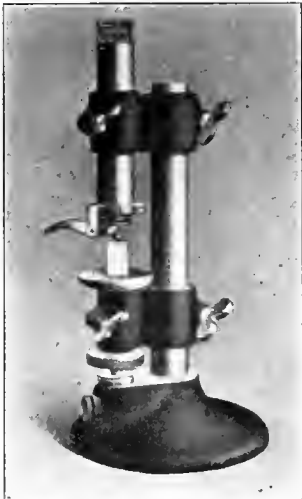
The Minimeter mounted for Measuring on Flat Surfaces
